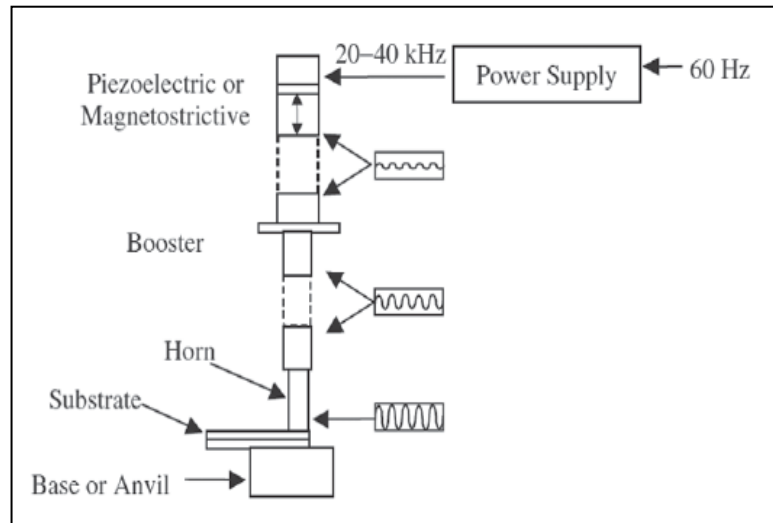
Diagram of an ultrasonic welding machine [32].
